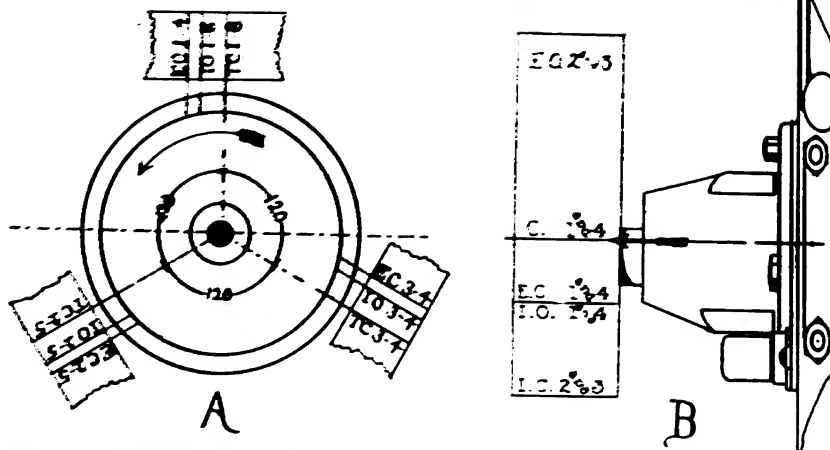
FLYWHEEL MARKINGS OF MULTI-CYLINDER MOTORS. A—SIX CYLINDER AND B, FOR FOUR CYLINDER
